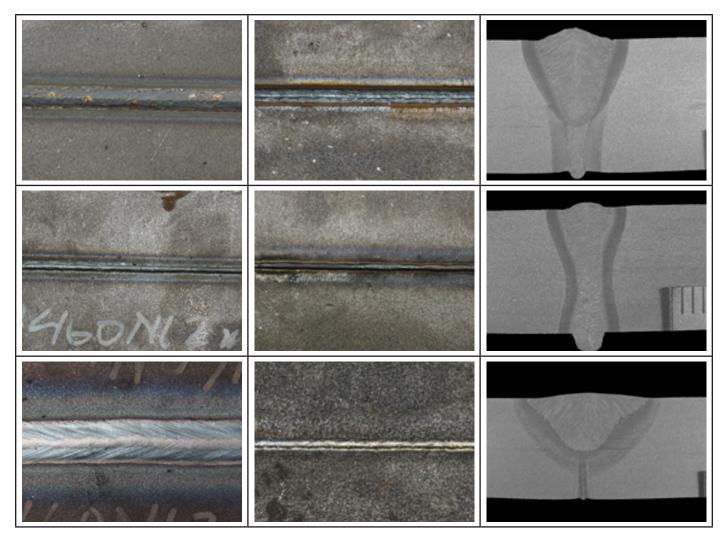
Structure of exemplary joints made during the technological tests: a) weld face after welding (variant 1, HLAW), b) weld root after welding (variant 1, HLAW), c) joint macrostructure (variant 1, HLAW), d) weld face (variant 2, HLAW, unbevelled joint), e) weld root, (variant 2, HLAW, unbevelled joint), f) joint macrostructure (variant 2, HLAW, unbevelled joint), g) weld face after submerged arc welding (variant 3, laser + arc, h) weld root after submerged arc welding (variant 3, laser + arc)
